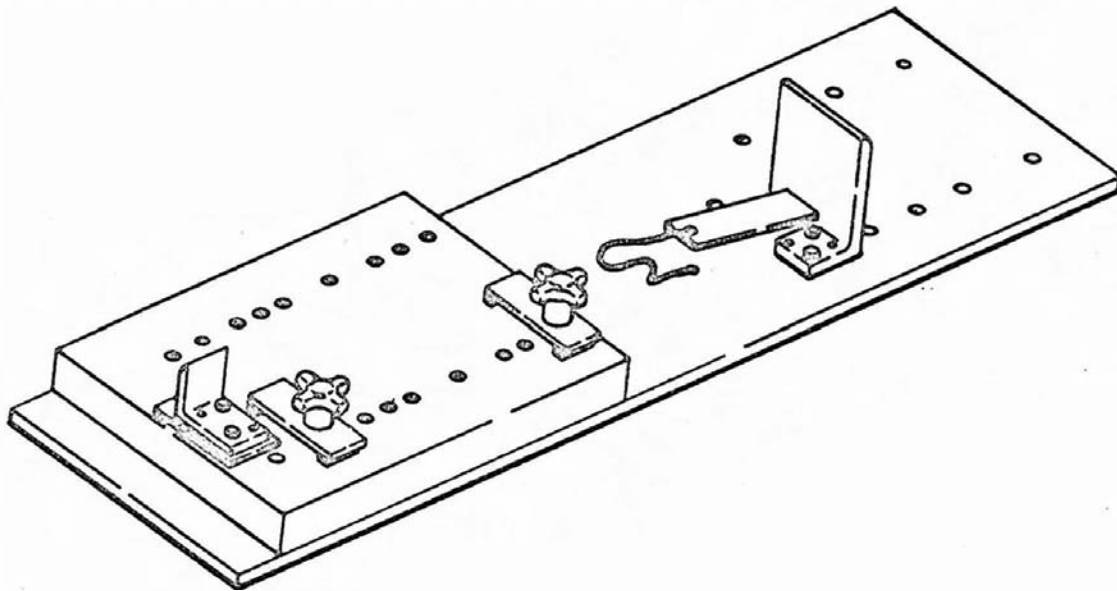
12. Base Heatshield Beam Assembly, Assembly Fixture
